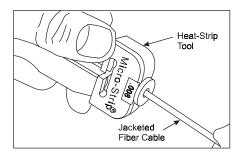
Heat-Strip Tool - Jacketed Fiber Cable
